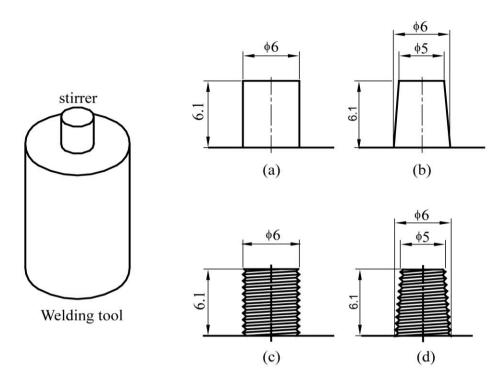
Dimension of the stirrer: (a) an unthread cylindrical stirrer, (b) an unthread cone stirrer, (c) a right screw cylindrical stirrer and (d) a right screw cone stirrer. (unit: mm)
